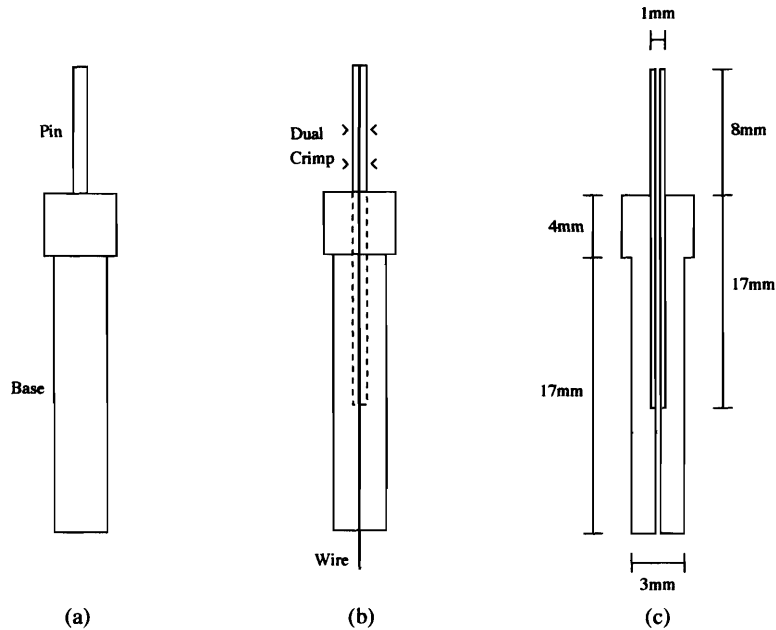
A feedthrough used to hold a drift wire. (a) View of the feedthrough (b) A crimped feedthrough holding a wire (c) Dimensions of a feedthrough
